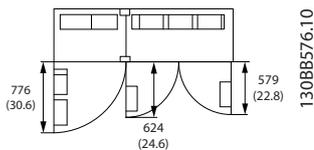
Front Clearance of IP21/IP54 Enclosure Type, Frame Size F12
